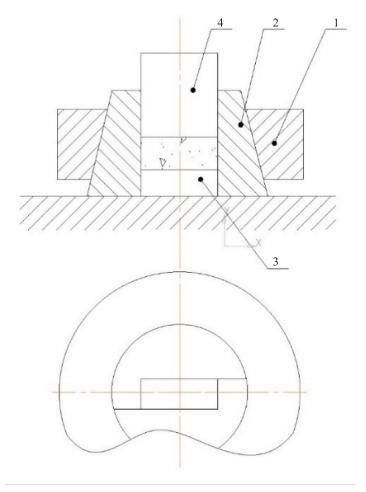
Diagram of the mold for cold pressing of prismatic samples
